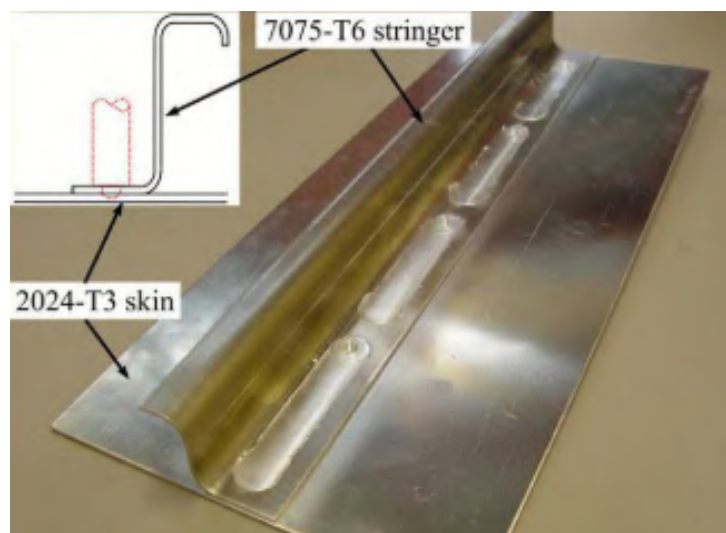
Stringer and skin panel, respectively in 7000 and 2000 series aluminium alloys, assembled via FSW. FSW is here a substitute for riveting.
